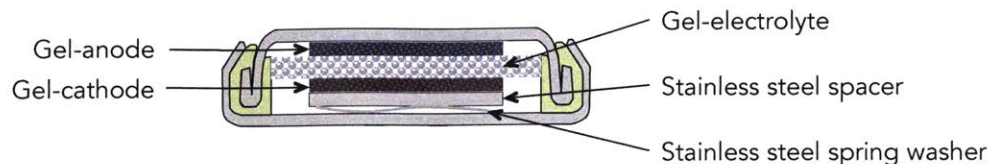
Schematic cross-section of the coin-cell assembly.
